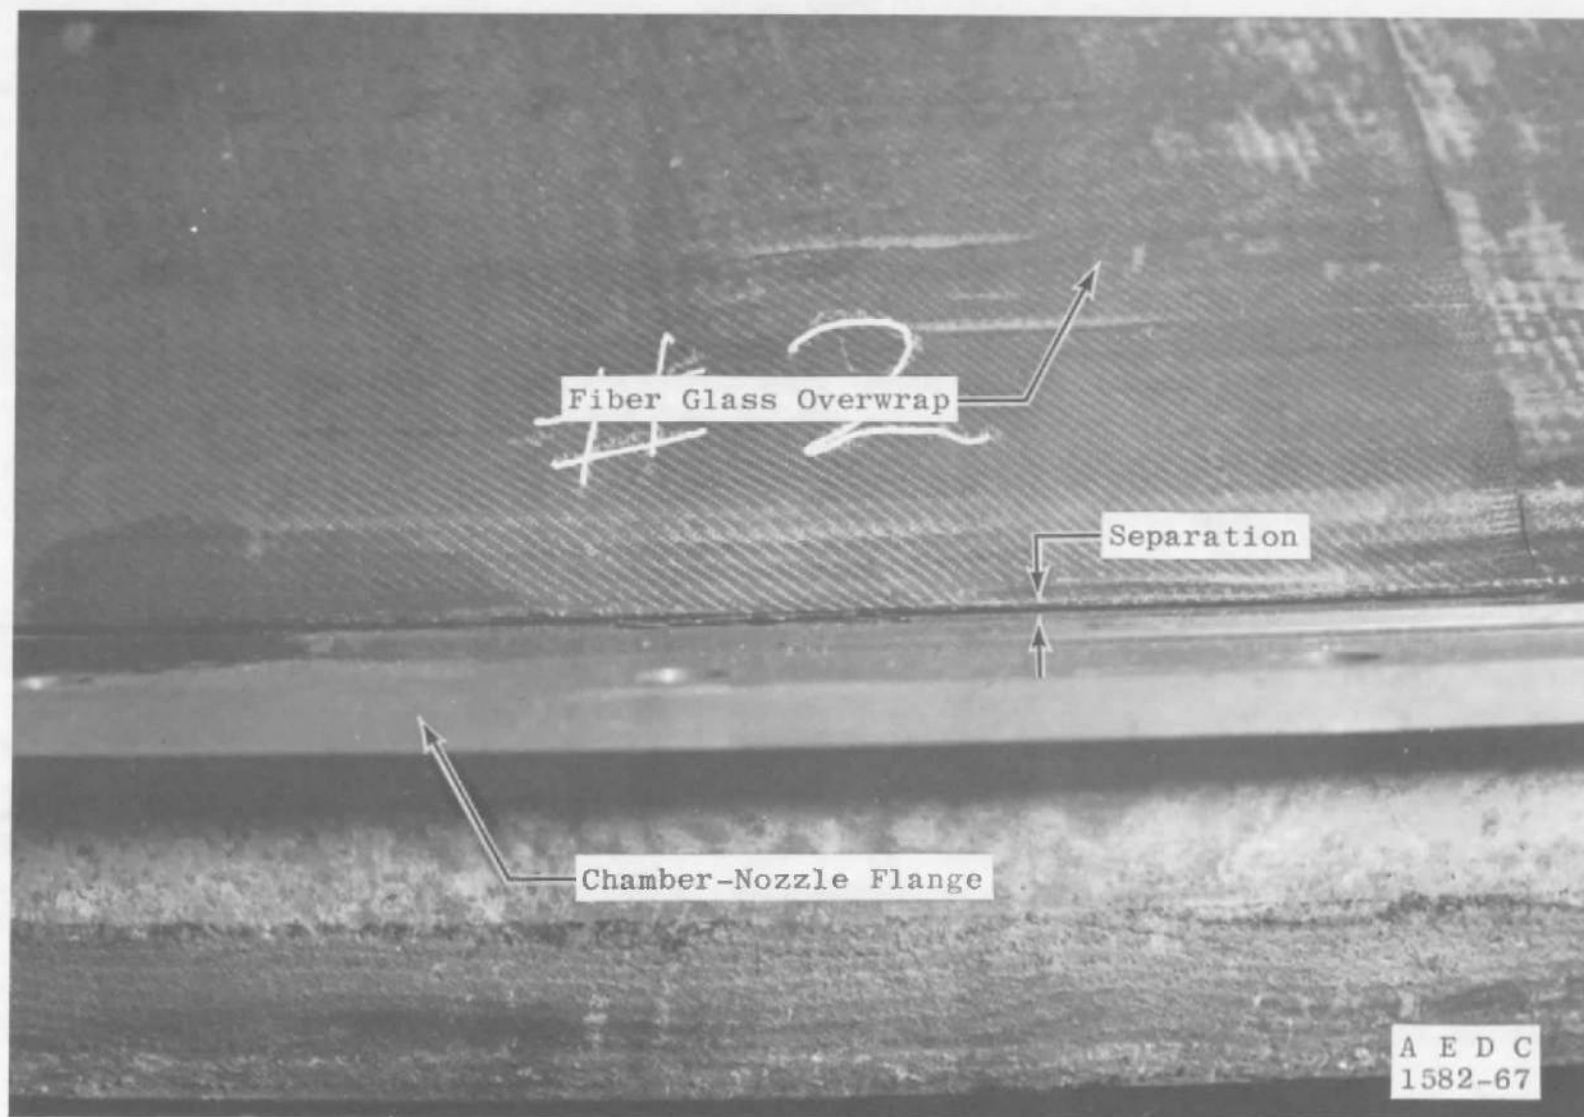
Separation of Fiber Glass Overwrap from the Chamber-Nozzle Flange
